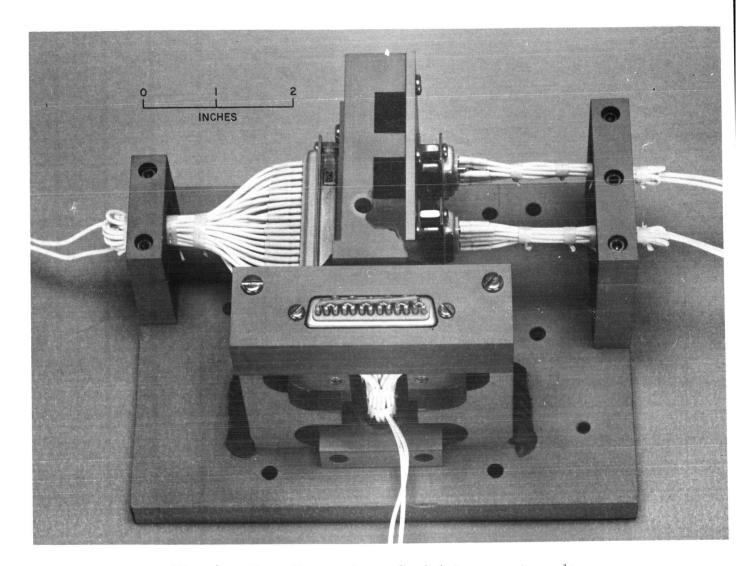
Test fixture for subminiature rectangular connectors and associated wiring
